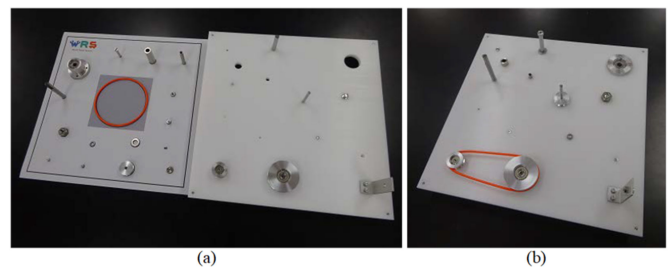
Task board used in the 2018 World Robot Summit: (a) setup prior to the start of the assembly task (b) the assembled task board.
